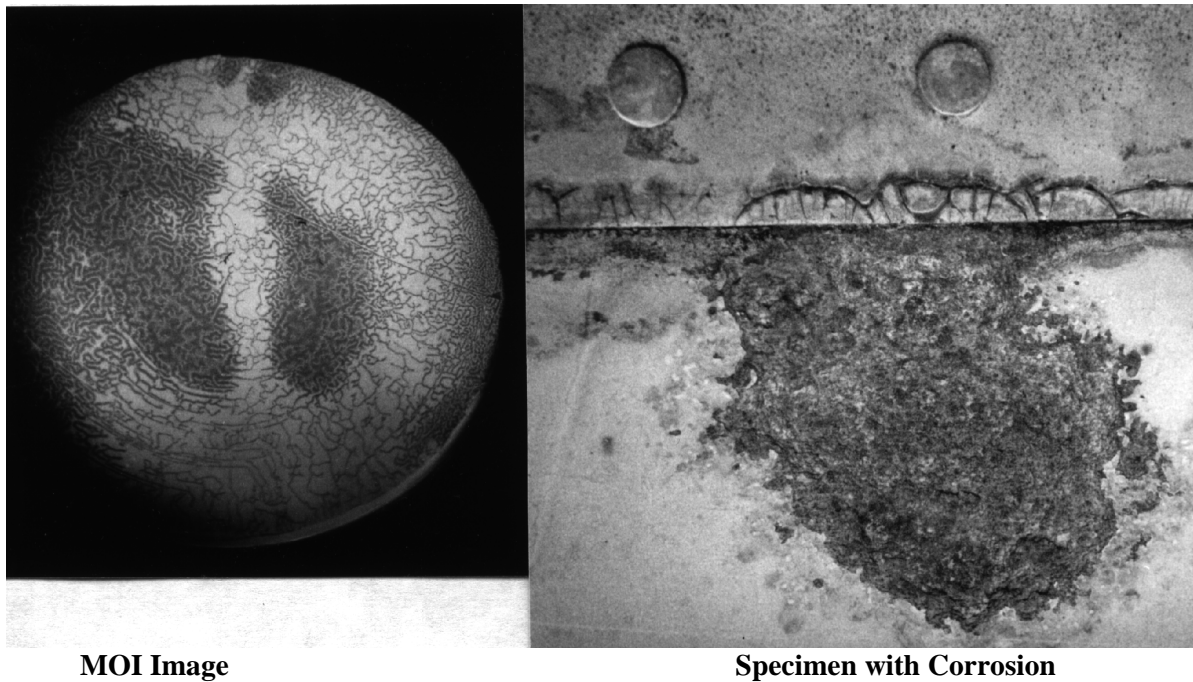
MOI Image of Cracks at Fastener Holes
